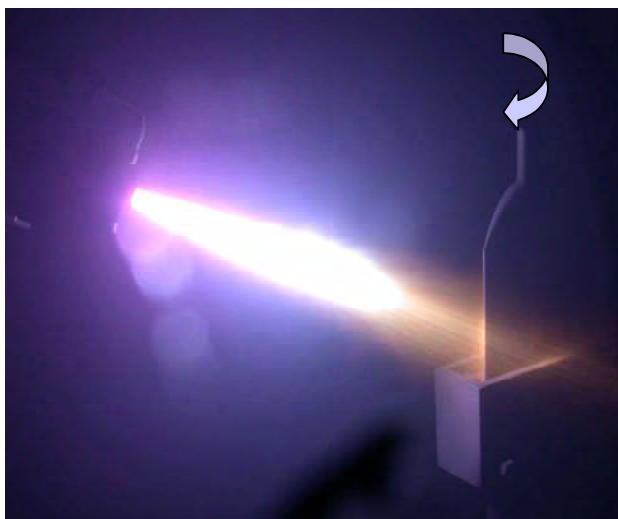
A plasma spraying scene to produce the quasi-turbine nozzle mold for near-net shaped casting.
